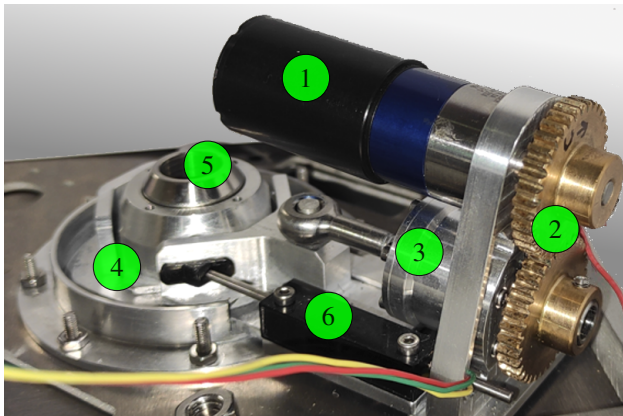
EMI-MOD Locking mechanism consisting of (1) actuator (2) gears (3) spindle drive (4) semicircular clamps (5) bolt from counterpart of EMI-MOD (6) position sensor.
